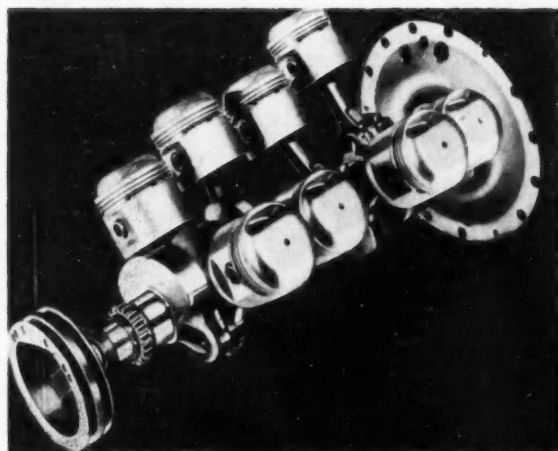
Cam-contoured counterweights provide minimum clearance between the counterweights and piston skirts
